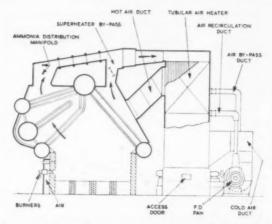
Simplified sectional elevation of marine-type boiler, installation "C"
